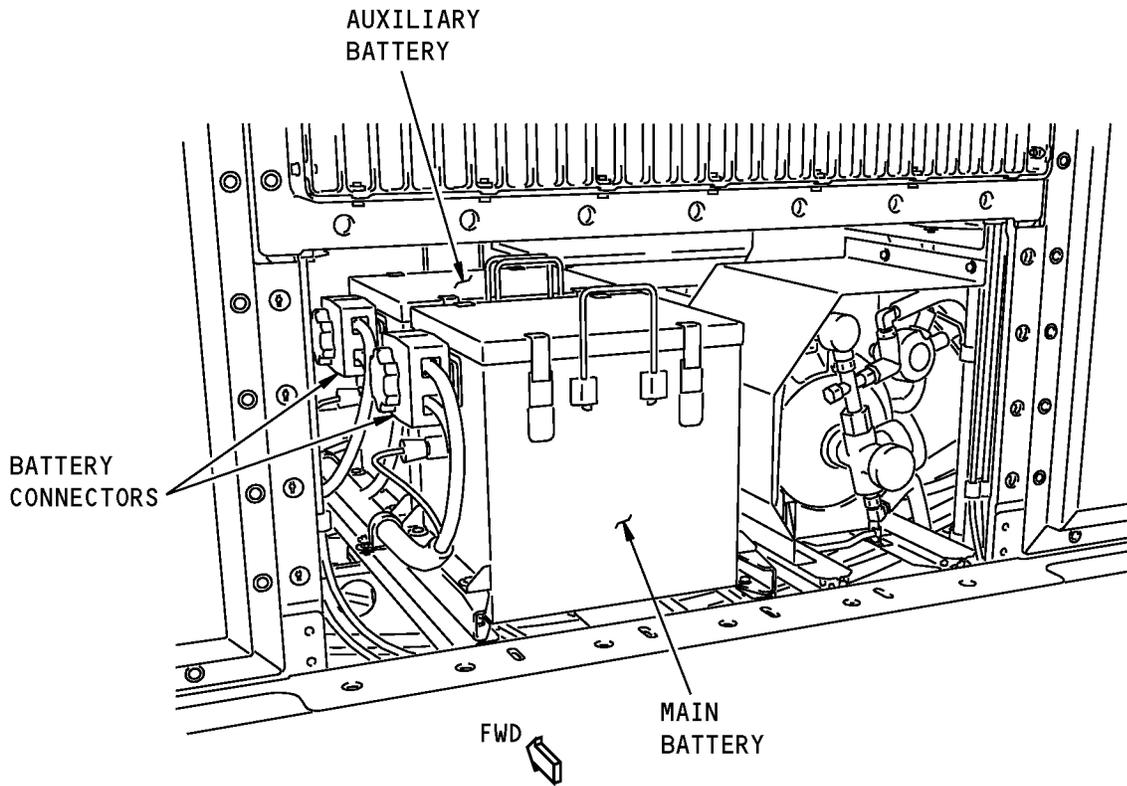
(Sheet 1 of 2)/24-31-41-990-803
